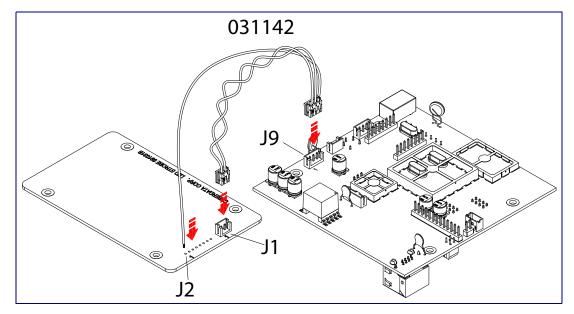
021054 and 021084 Boards Connected with the 031142 Cable Assembly
